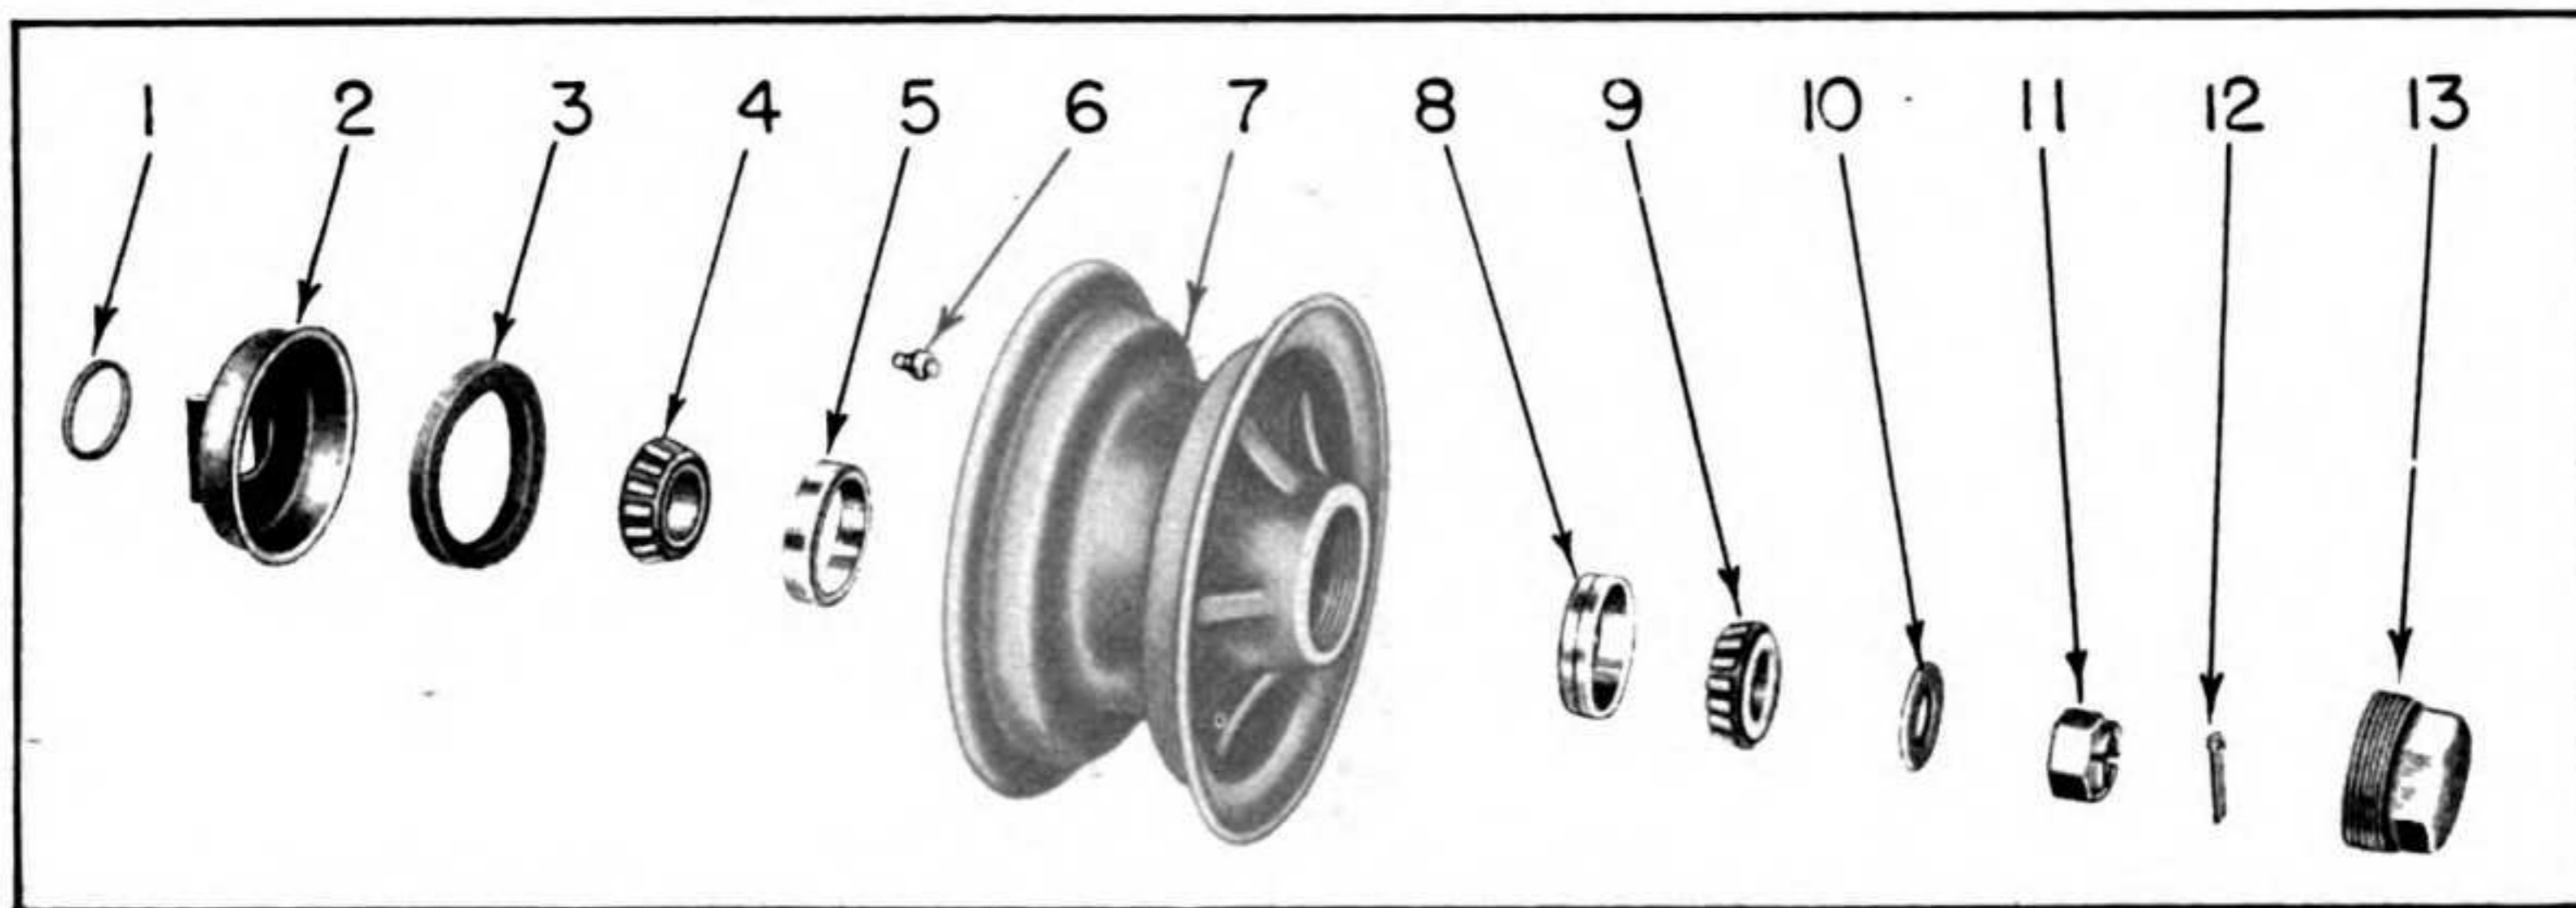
1301 FRONT WHEEL ASSEMBLY
